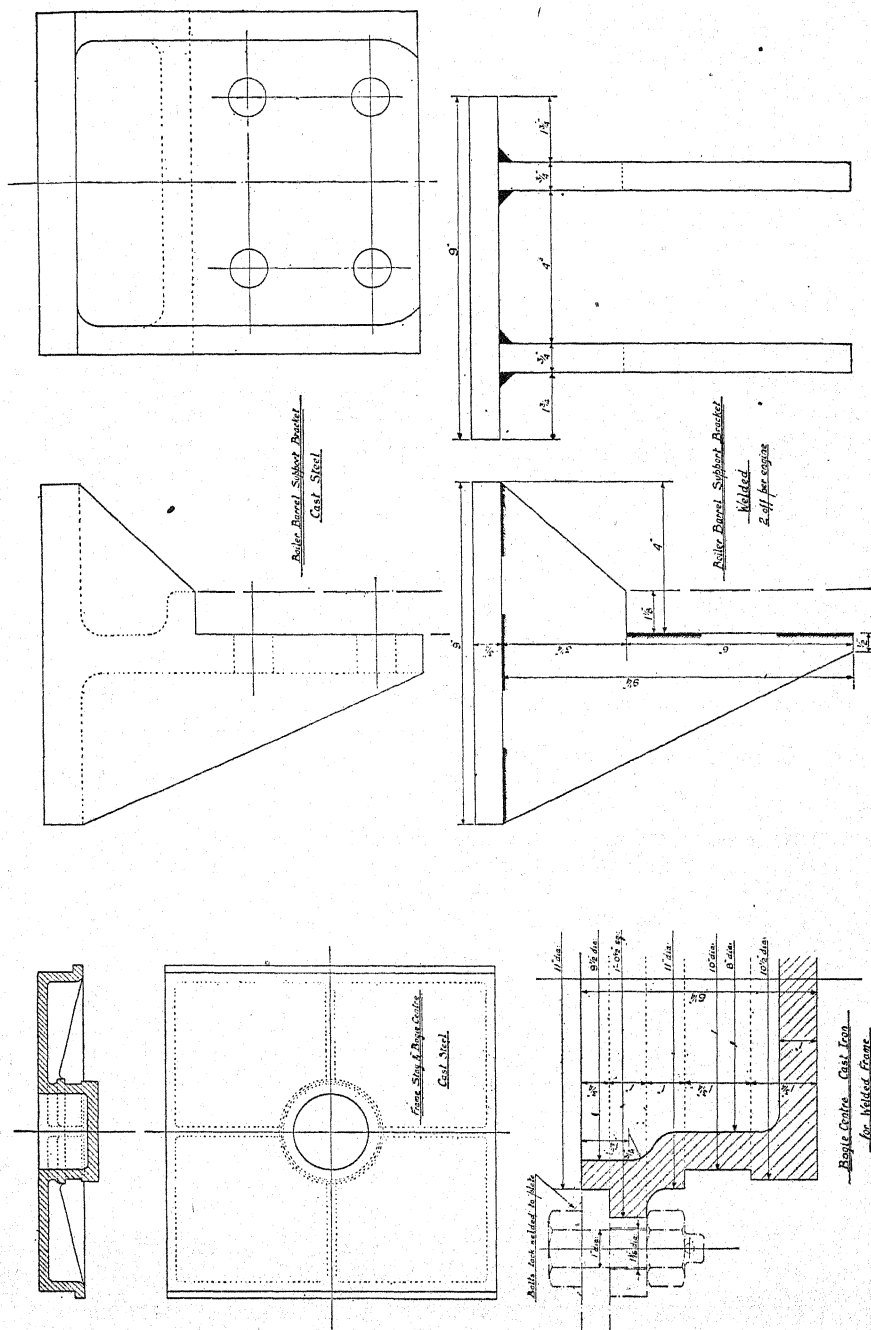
Steel castings for frame stay and boiler barrel support brackets in welded construction; also boiler barrel support brackets in riveted construction.
